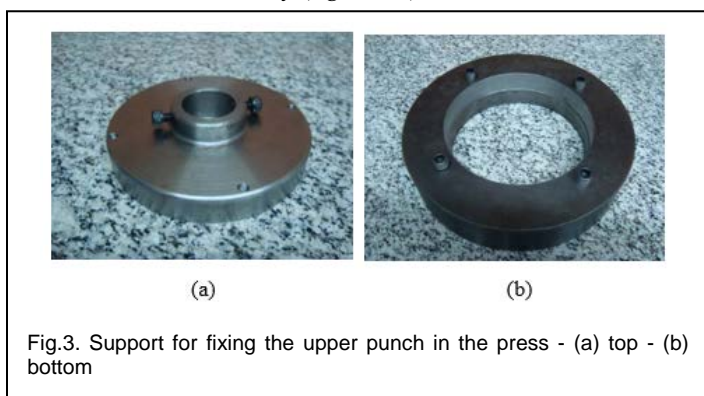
Support for fixing the upper punch in the press - (a) top - (b) bottom
